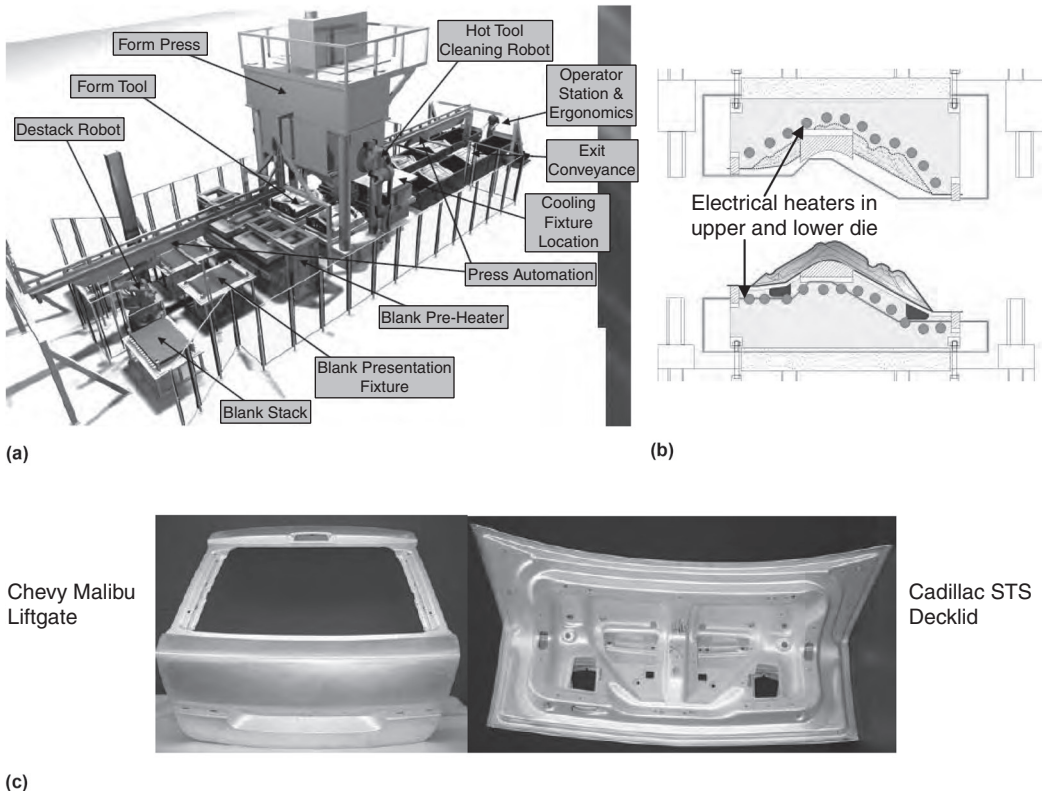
Quick plastic forming process. (a) Schematic of production forming cell at General Motors. (b) Schematic of the heated tool. (c) Example formed production parts
